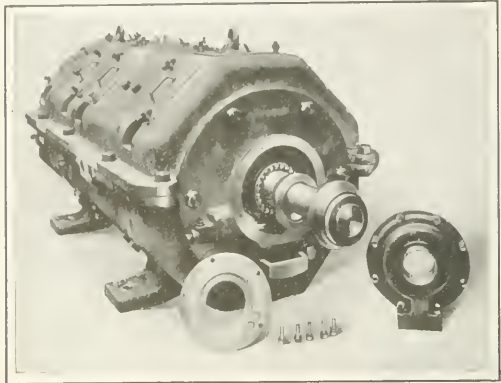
Motor-generator Set with Bearing Cap removed to show Ball Bearings
